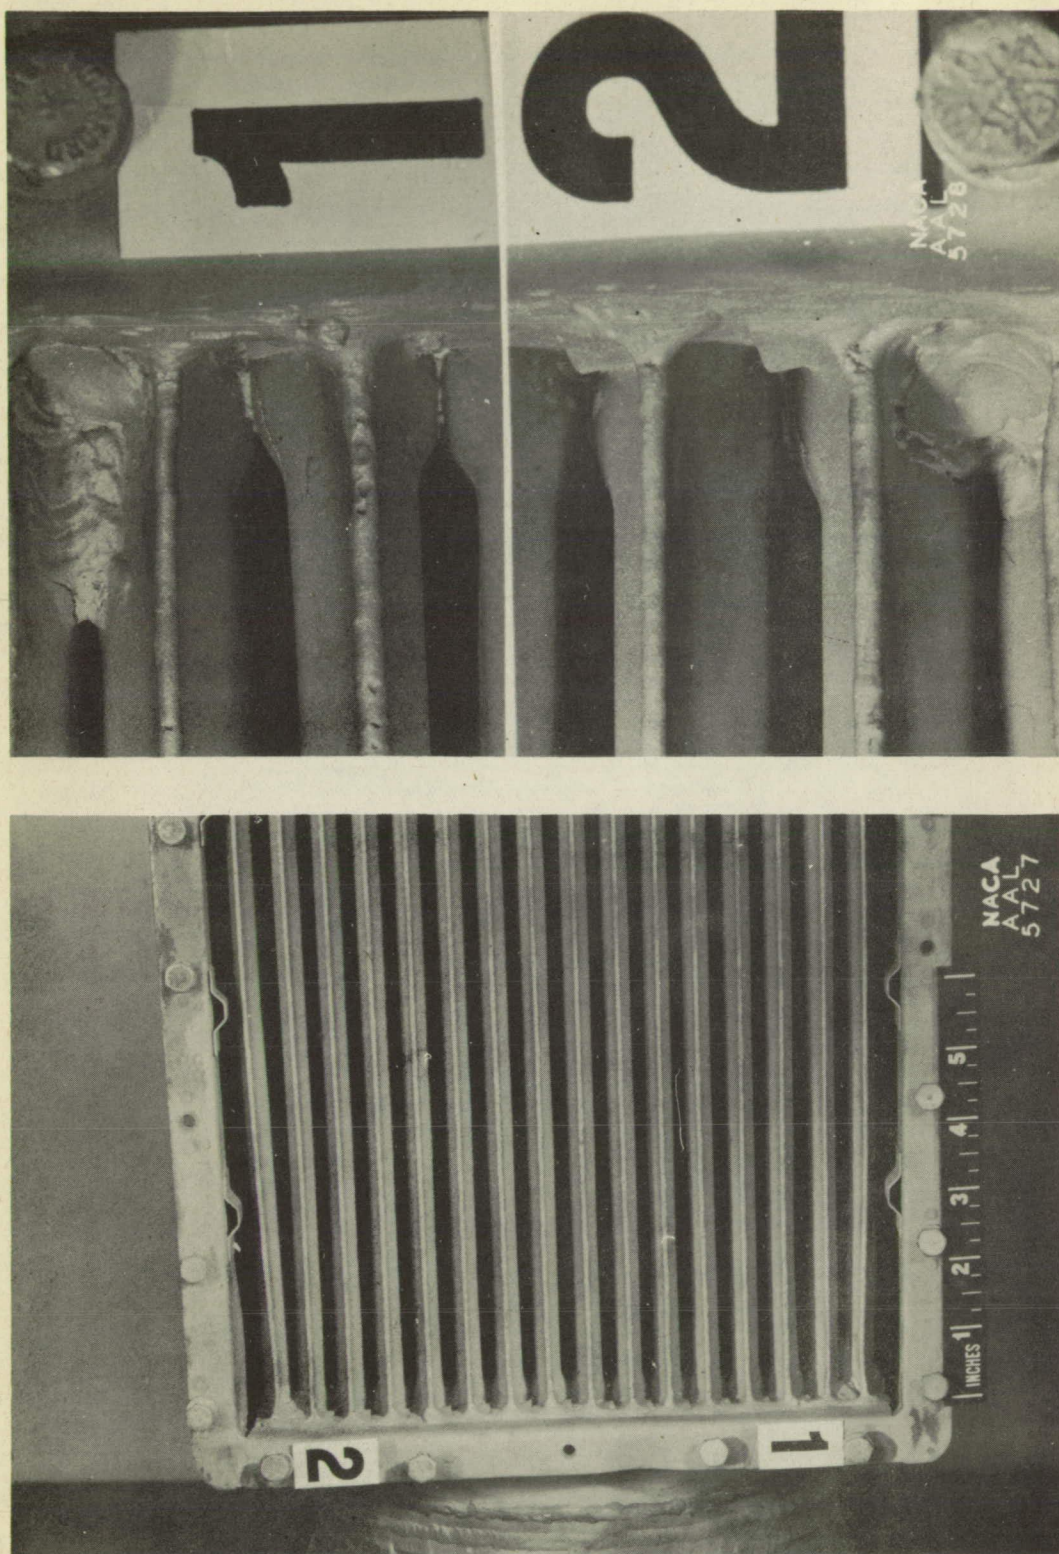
Views showing air side of right inboard heat exchanger after 173 hours of flight testing, C-46 airplane.
